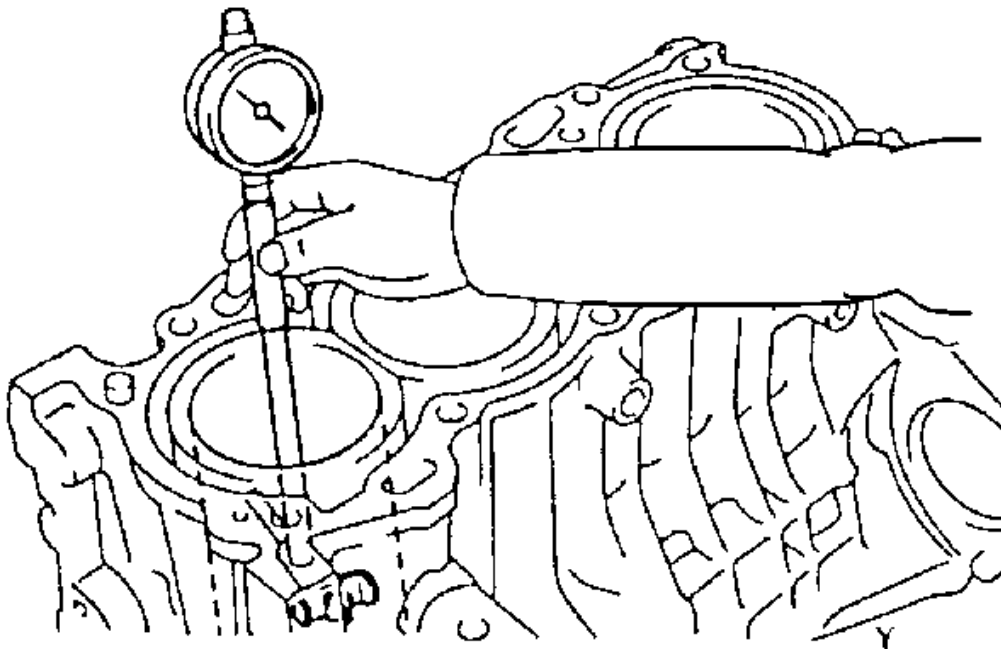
Measuring Cylinder Bore Taper, Out-Of-Round & Size
